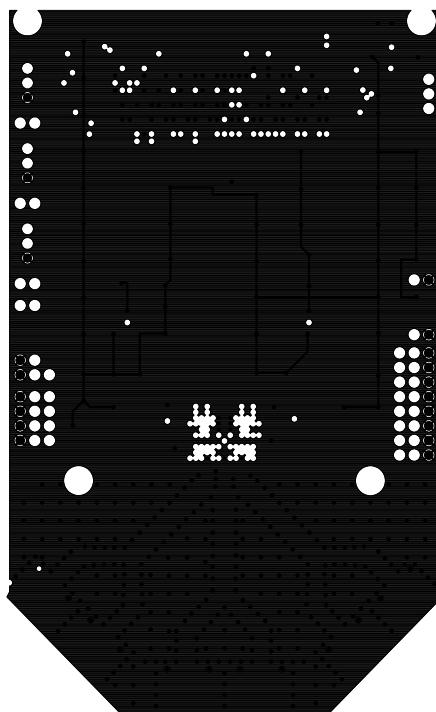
Si5110-EVB Layer 2—GND1 Plane (Daughter Card)
